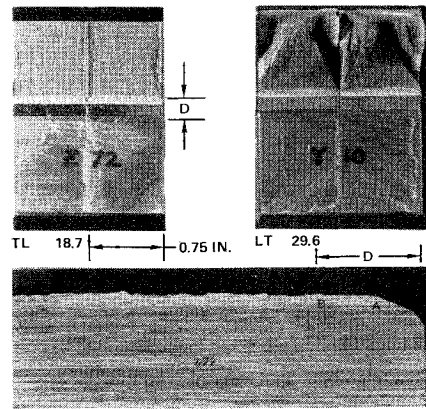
Fracture surfaces of 7050-T76511 extrusion codes Z and Y specimens illustrating flat and mixed fracture paths (upper photographs) and section through specimen Z72 at  $5\times$  showing fracture edge and grain flow (lower photograph). The notch root is at A, the fatigue precrack front is at B, and the remainder is the fast fracture surface. Test specimen orientations and  $K_{Ic}$  values are indicated.
